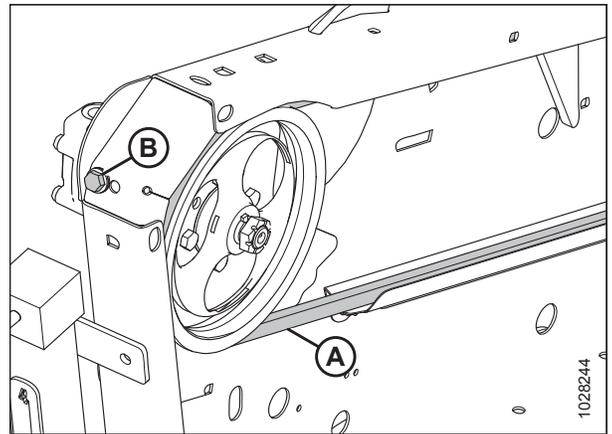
Knife Drive Belt and Pulley – Double-Knife Header, View from Rear
